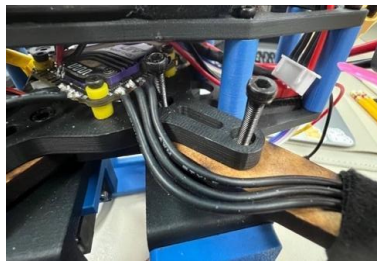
Machine arm locking screw 2 (sandwich structure side view)
